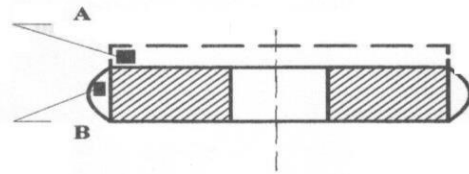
Sampling of gear wheels rim forgings and its number
